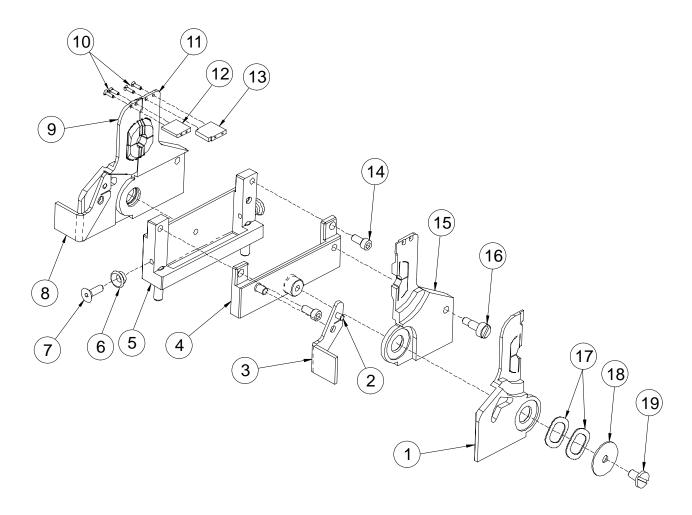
SWS-8MFA- Micro Weld Head Fixture
